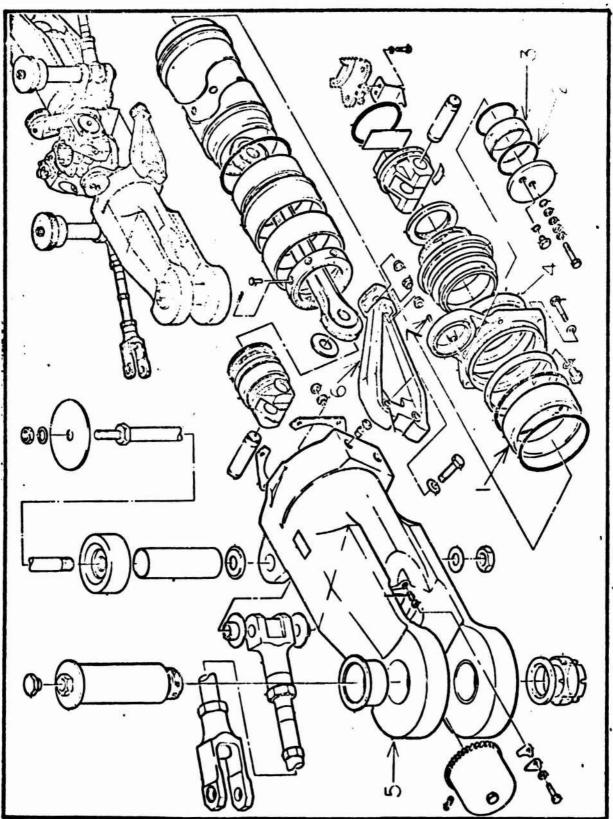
Hub Assembly, Main Rotor, Outboard Section
